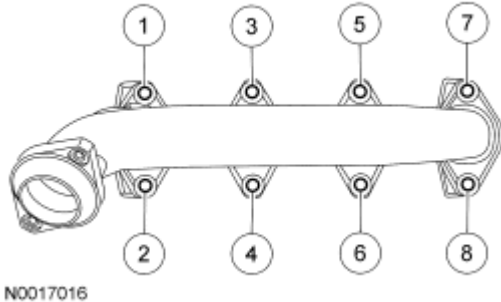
Tightening RH Exhaust Manifold Bolts In Sequence
